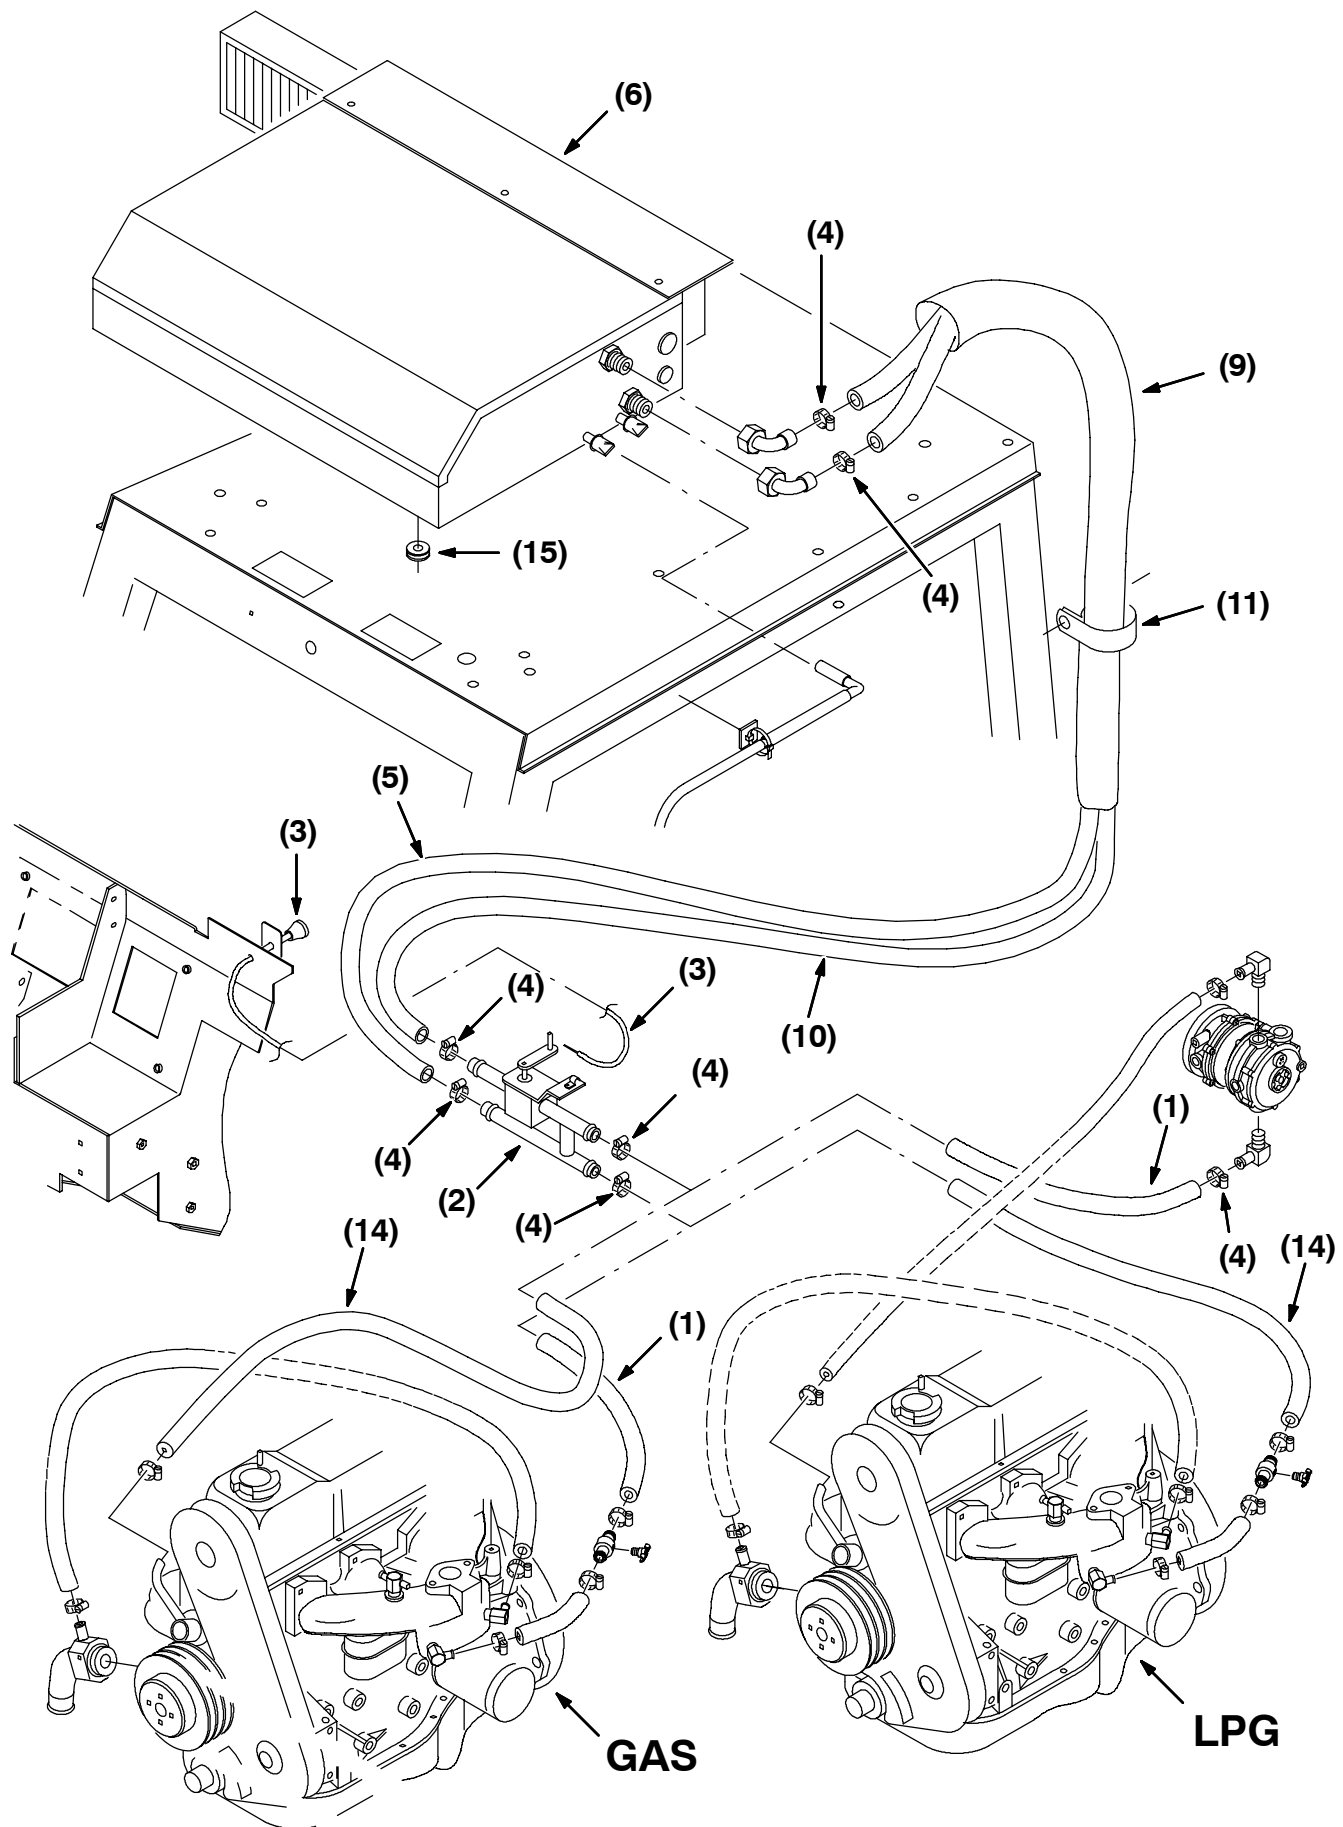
Heater Hose Connections And Heater/pressurizer Installation
